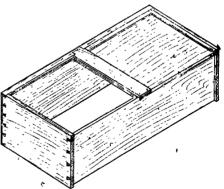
Wardrobe Drawer, Bottom Upwards.
